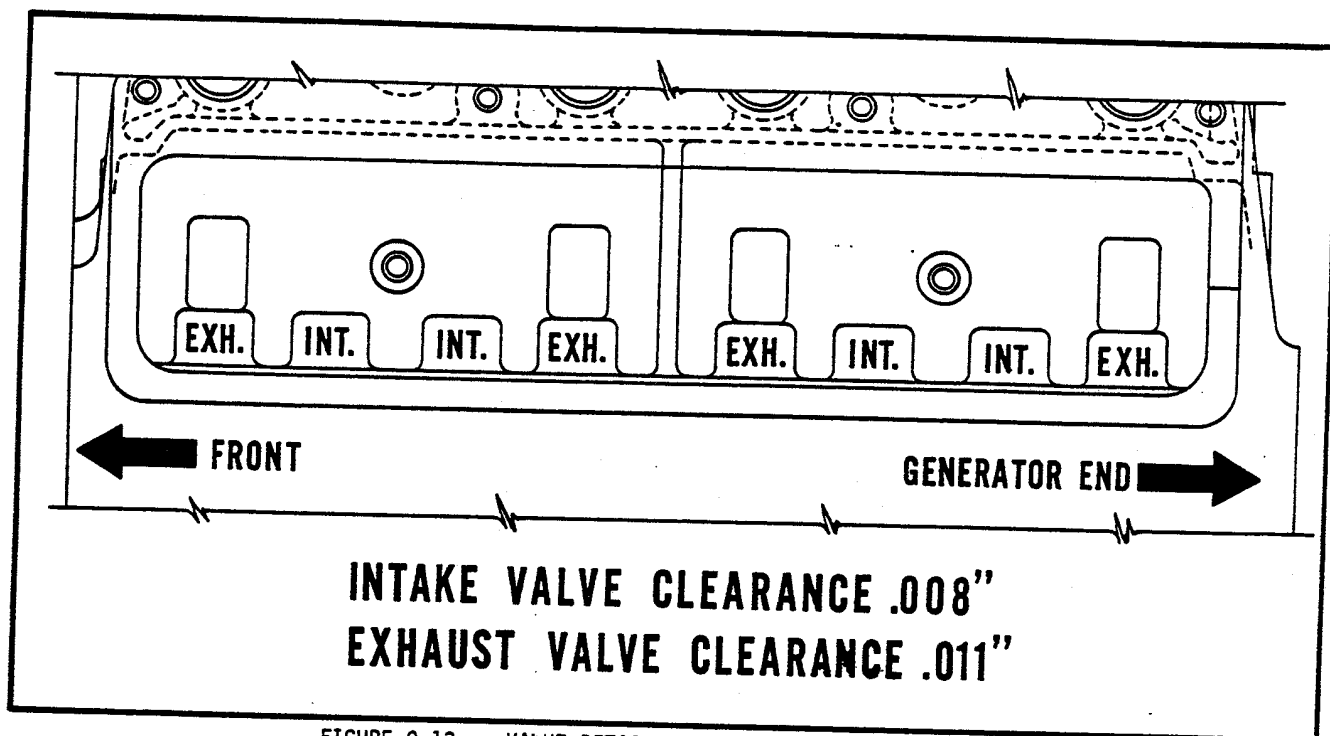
VALVE DETAILS , VALVE - TAPPET CLEARANCE
